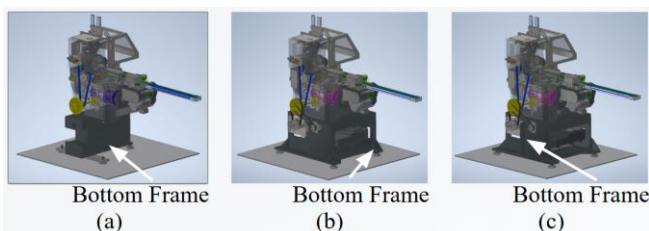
(a) Design 1: Factory-built frame; (b) Design 2: Modified footplate; (c) Design 3: Modified frame wall.
